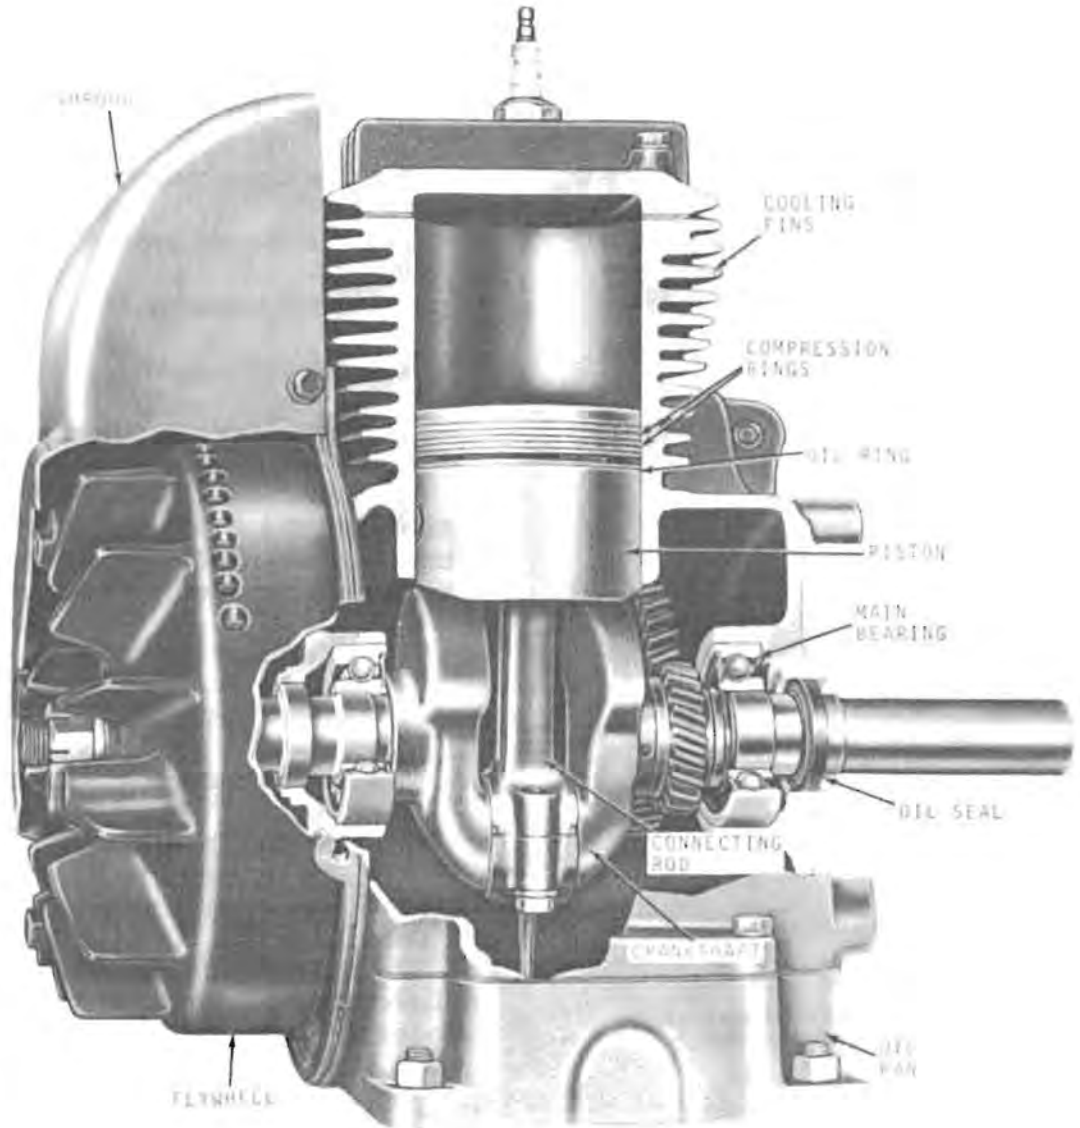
Cutaway View of Kohler K181S Engine Showing Piston, Crankshaft and Bearings
